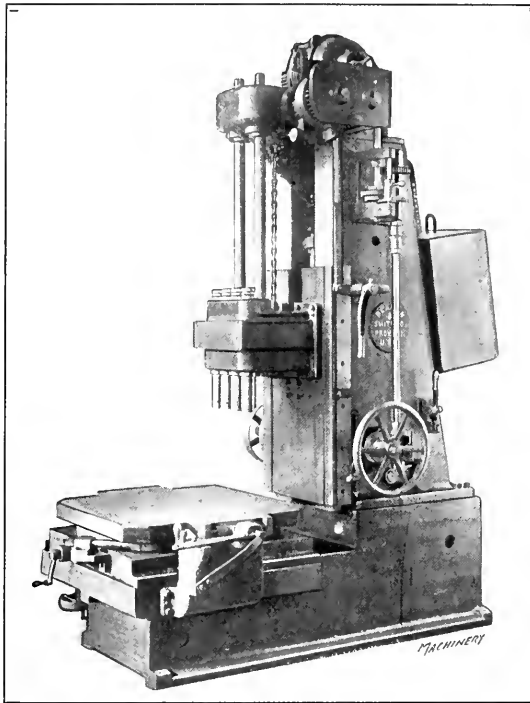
Beaman & Smith Cylinder Boring Machine used for boring and reaming Engine Cylinders
